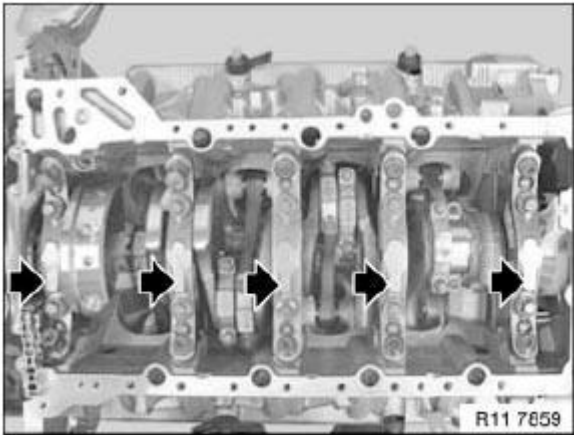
Identifying Arrangement Of Main Bearing Caps
